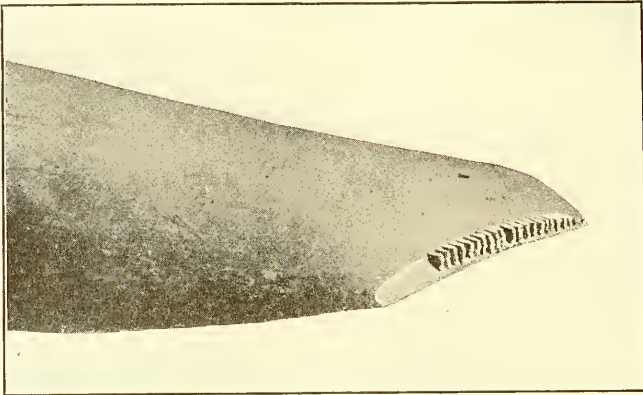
Propeller Blade Partly Beveled for Welding.
